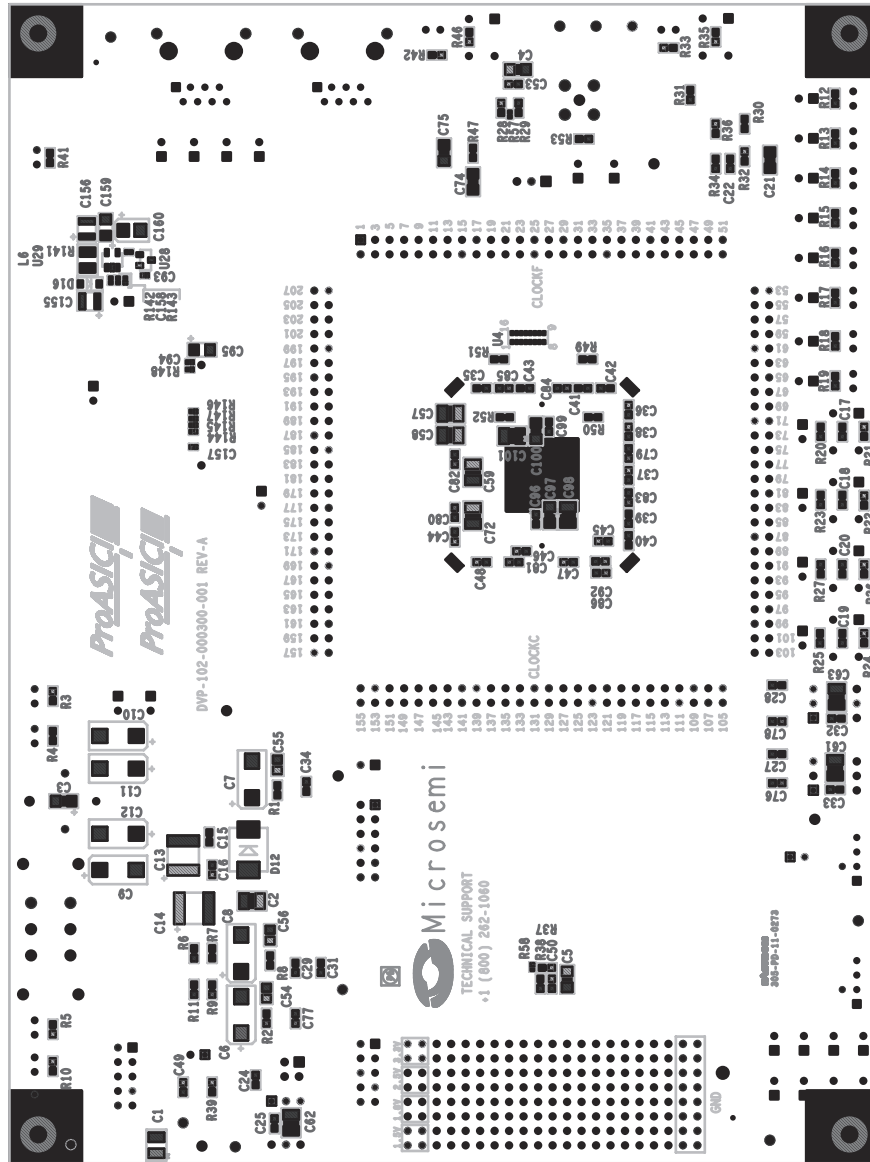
• Bottom-Level View of ProASIC3/E Starter Kit Board
